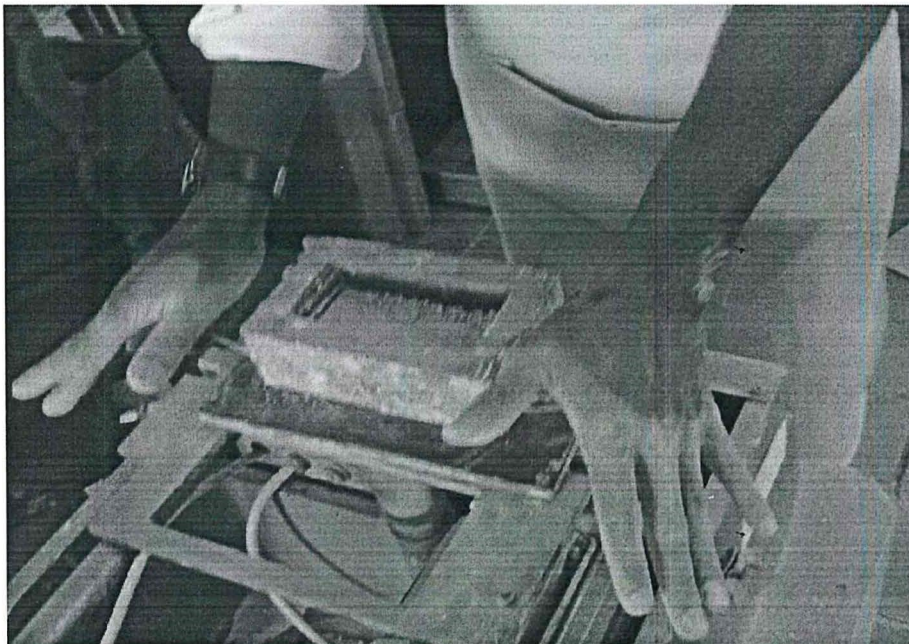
Picture of a Body on a Jigger Table ready for Leveling.
